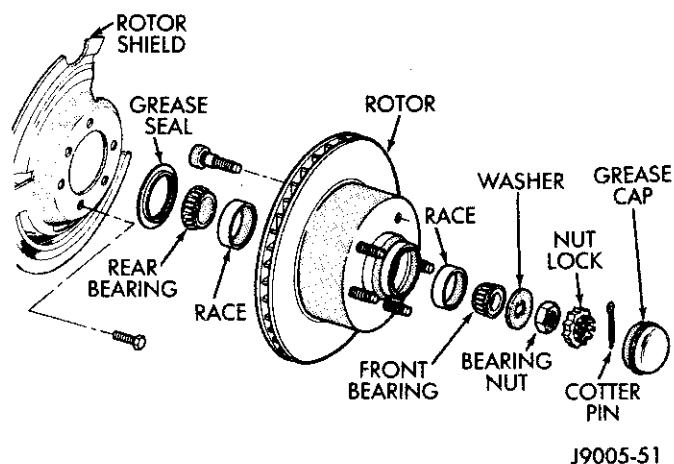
Two Wheel Drive Rotor And Bearings—XJ/MJ
